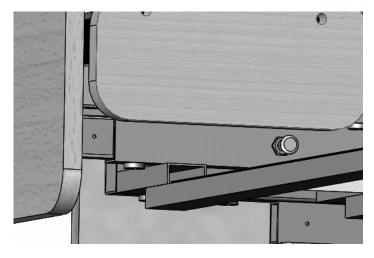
Raster position for adjusting the footrest (220 cm lying surface length)
